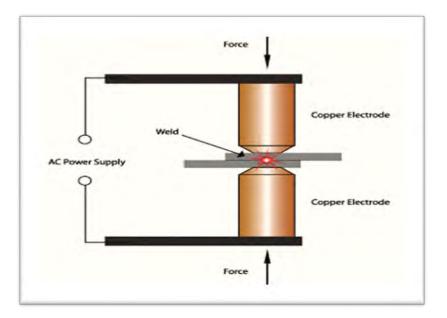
Spot Welding Process (Sahota et al. 2013)
